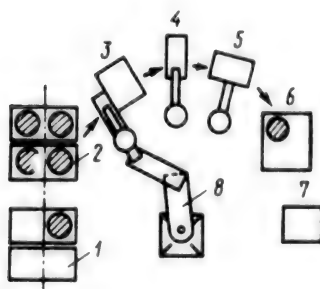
Layout of Robotized Section for Finish Machining of Castings
